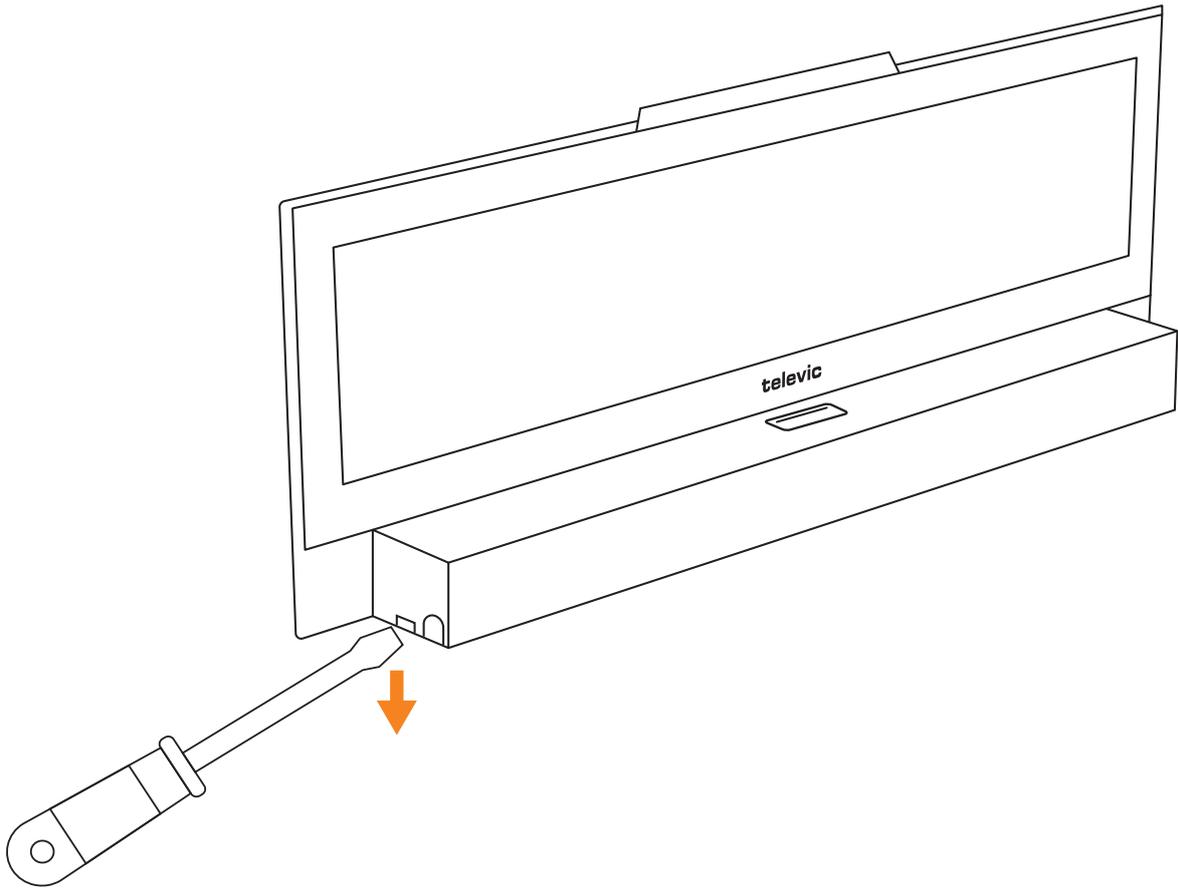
How to detach the nameplate from the mounting bracket and bottom plate
